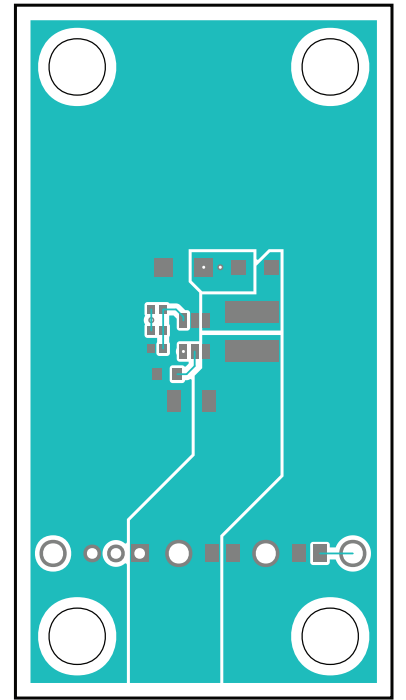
EVAL-ADPL21610-AZ PCB Layout—Top View
